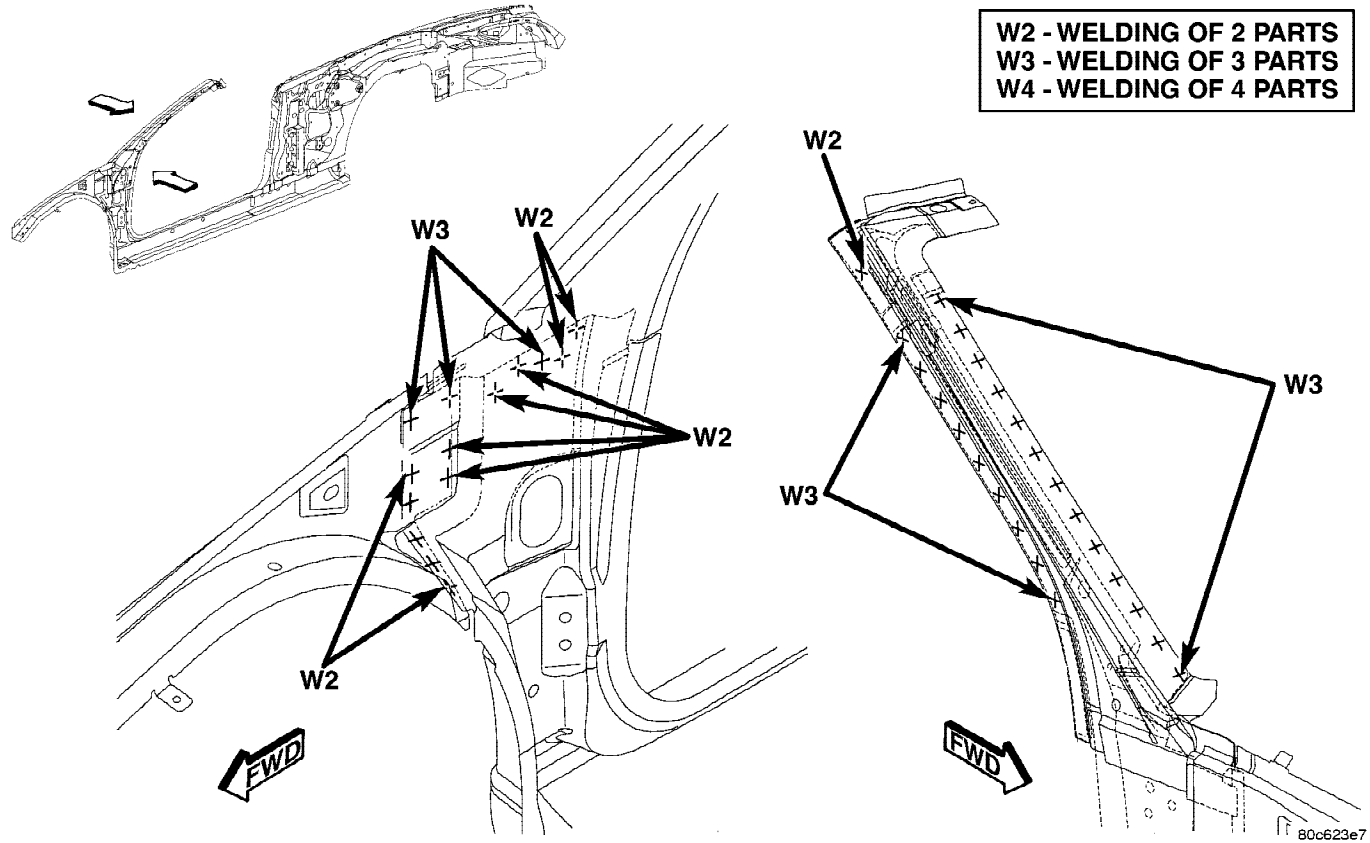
OUTER WINDSHIELD FRAME TO INNER REINFORCEMENT TO INNER WINDSHIELD FRAME TO UPPER LOAD PATH BEAM
